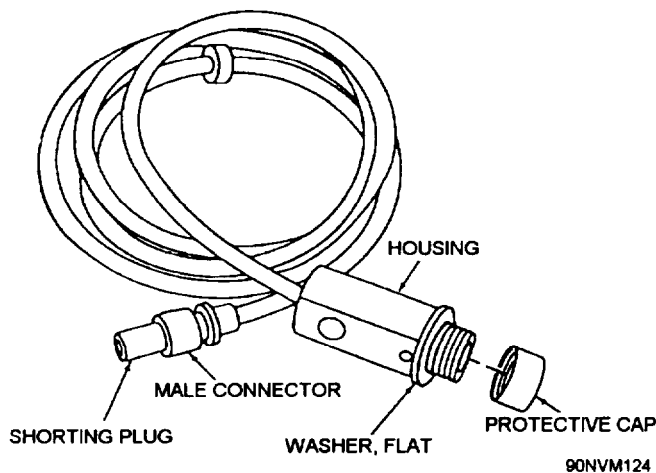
Mk 20 Mod 0 explosive fitting.
